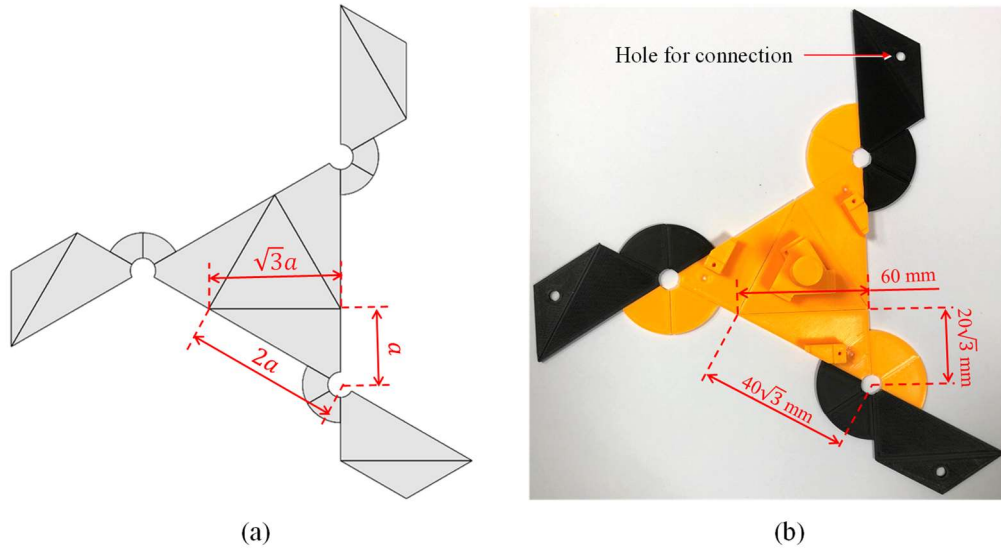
(a) The crease patterns of the helical origami mechanism; and (b) The completely unfolded prototype fabricated using 3D printing.
